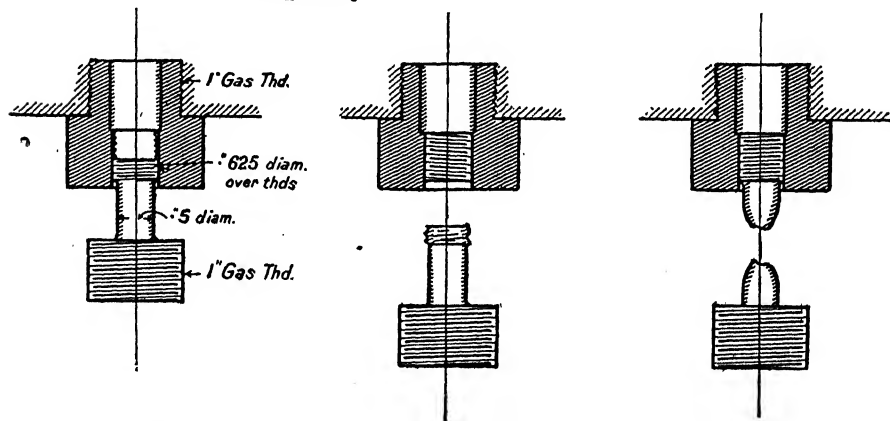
Screw Pair. FIG. 157.—Thread Failure. FIG. 158.—Shank Failure.
